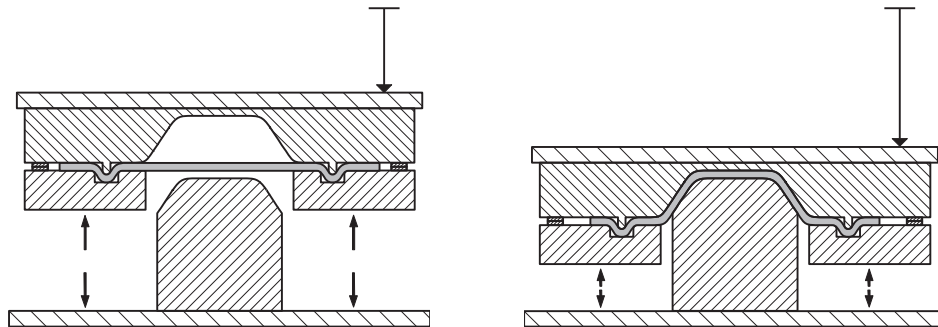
Example; Left: State of the tool after binder closing; Right: Final position of the tool after the forming operation.
